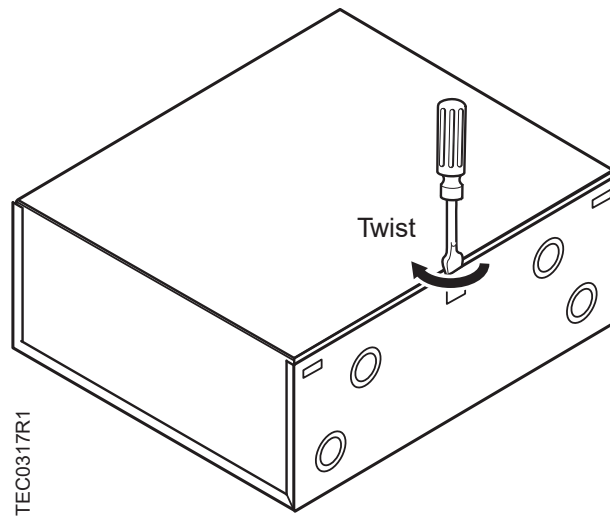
Enclosure 550-002 — First Step of Removing Cover (do both sides).
